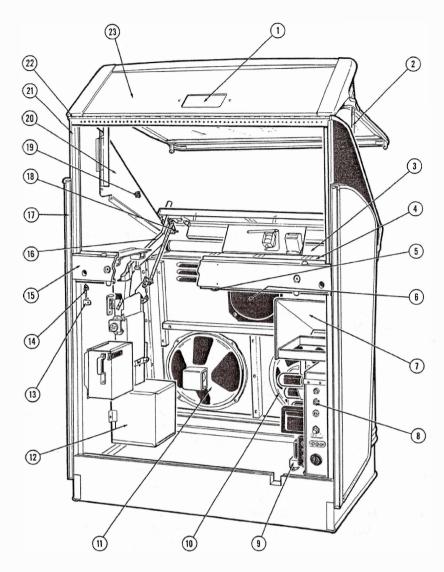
TRIM AND MOUNTING - REAR VIEW
